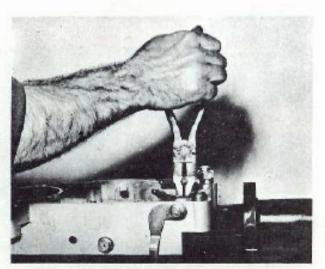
Pull out the retaining pin from the clutch release shaft.
